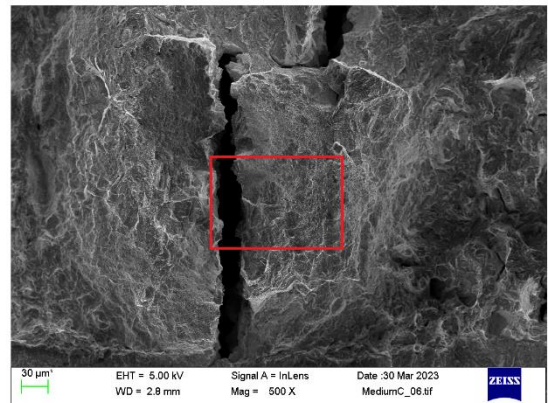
Overview of the fracture surface at vicinity of a deep secondary crack ahead of the fatigue precrack front in medium-carbon steel sample #1.
